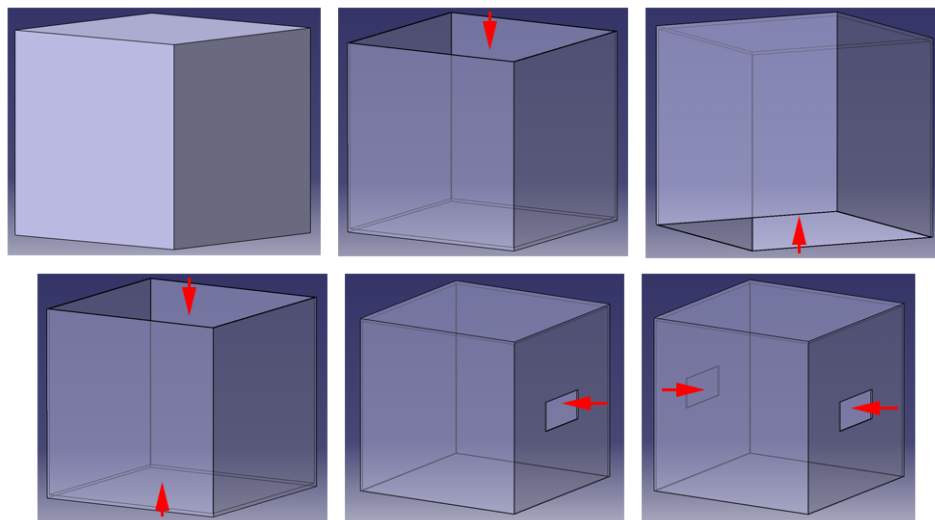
Sketches of the all the considered cage design options. Red arrows indicate the access to the inside of the cage. Top left to right: fully enclosed, access through PCB, access through bottom plate. Bottom left to right: access through PCB and bottom plate, access through one of the service holes, access through both of the service holes. Vertical direction of the figures is the direction the satellite units stacking
